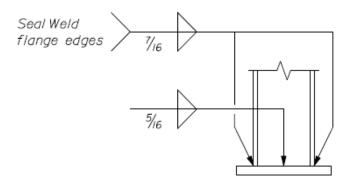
Weld specifications for post-to-baseplate in NETC railing designs. The design strength, ϕR_n , of the weld is computed as:
